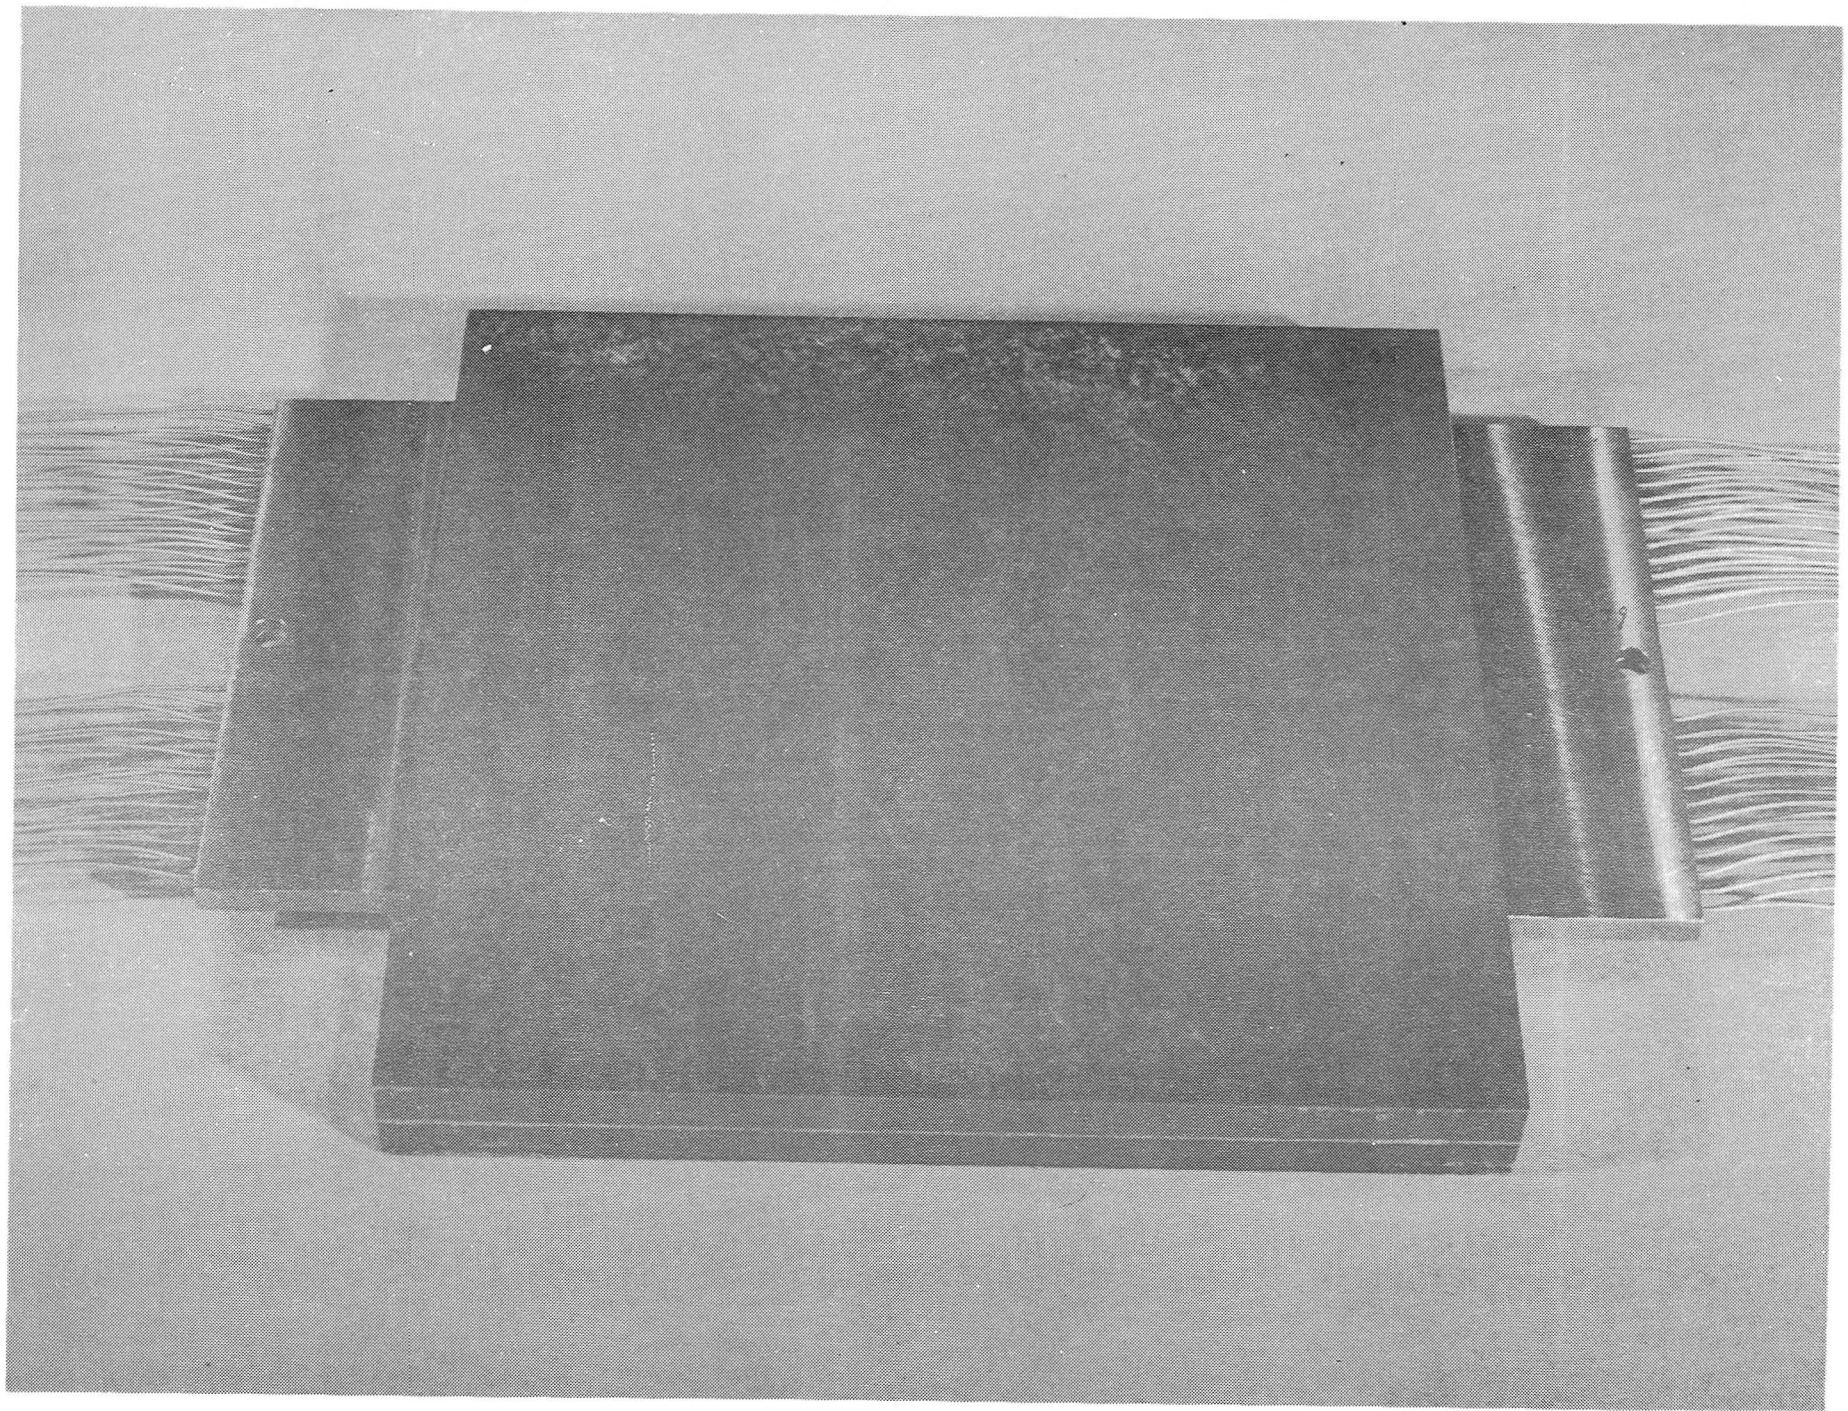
Symmetrical airfoil model after vacuum brazing; model now ready for leak check.
